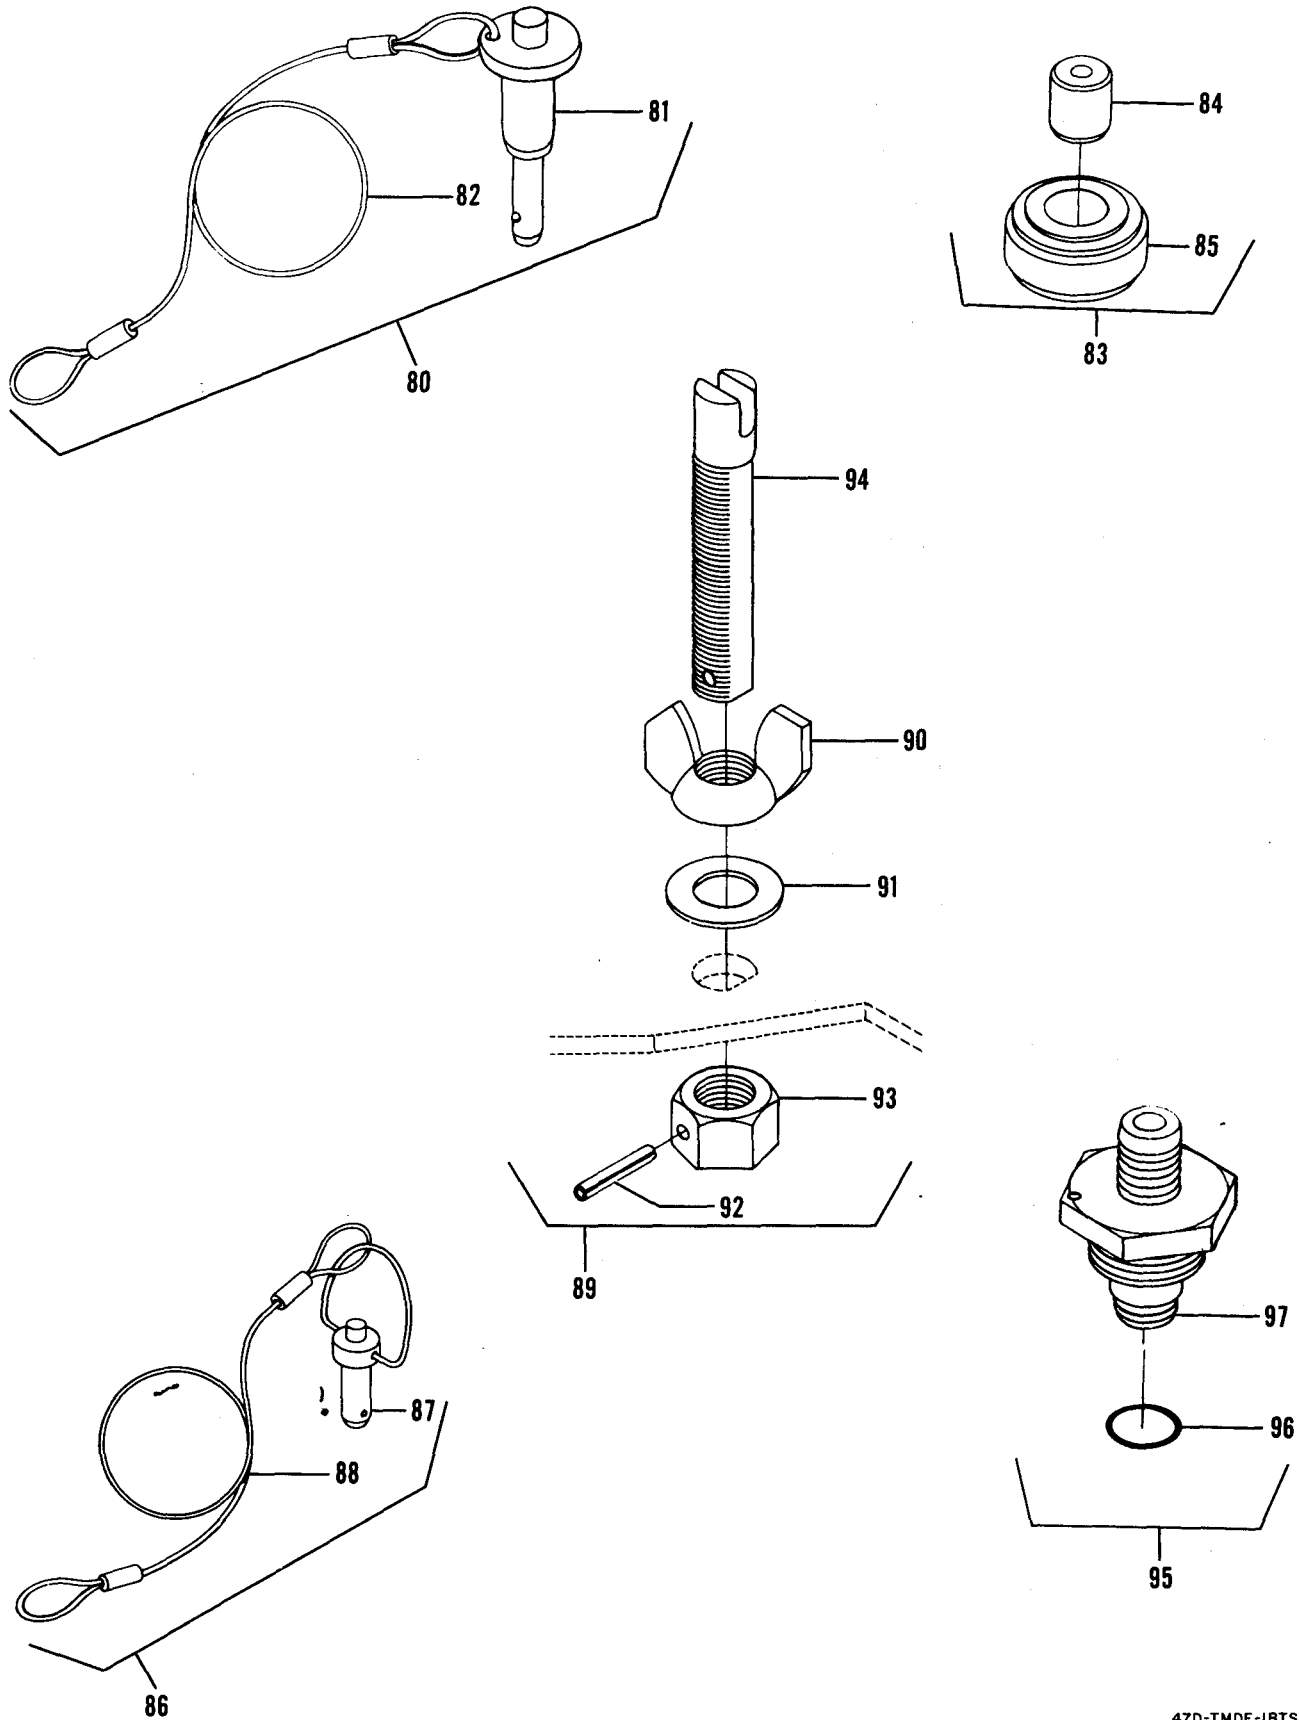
Hydraulic Unit (Sheet 4 of 4)
